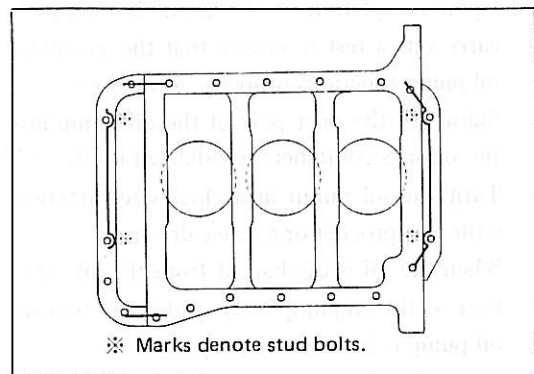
Sealer Applying Procedure (Cylinder Block Side)
